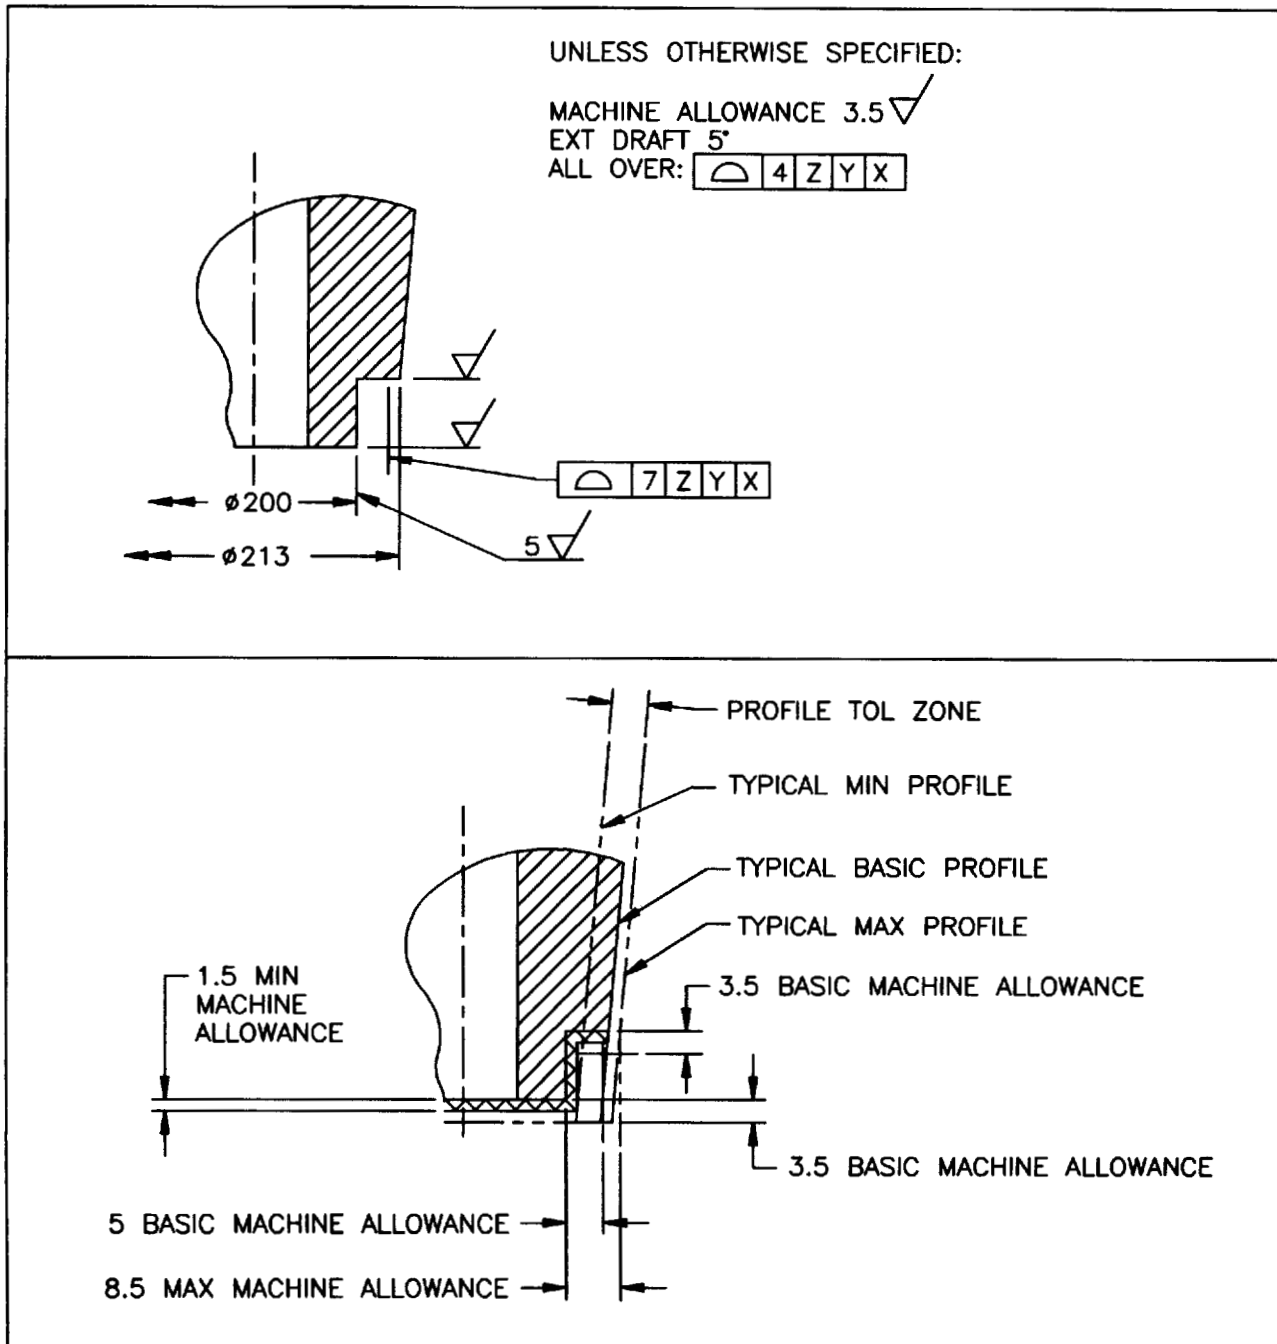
MACHINE ALLOWANCE — PORTION OF SURFACE WITH DRAFT
